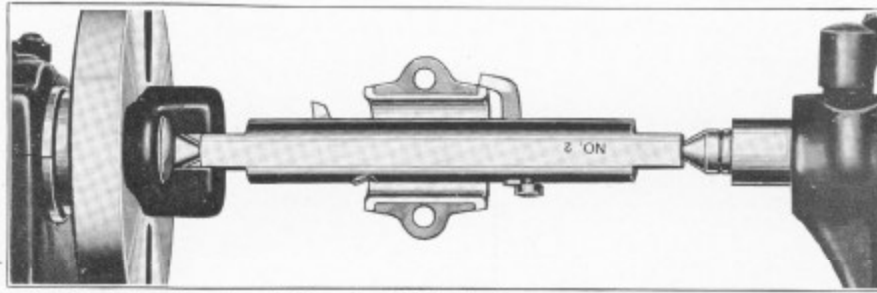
Trimming the end of bearing with boring bar mounted between the lathe centers.
